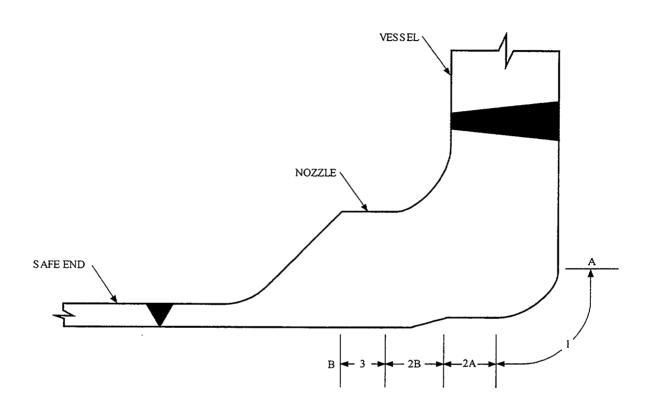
Nozzle Inspection Zones (Clad-Removed Nozzle)
